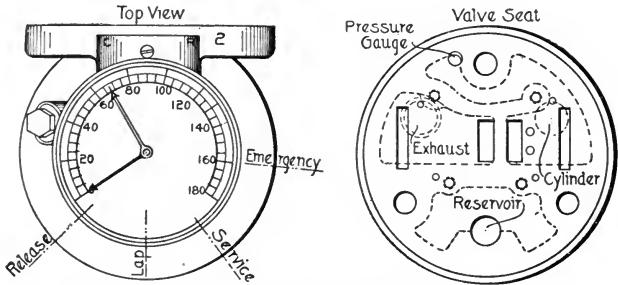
Top View and Valve-Seat of Westinghouse Straight Air-Brake.
